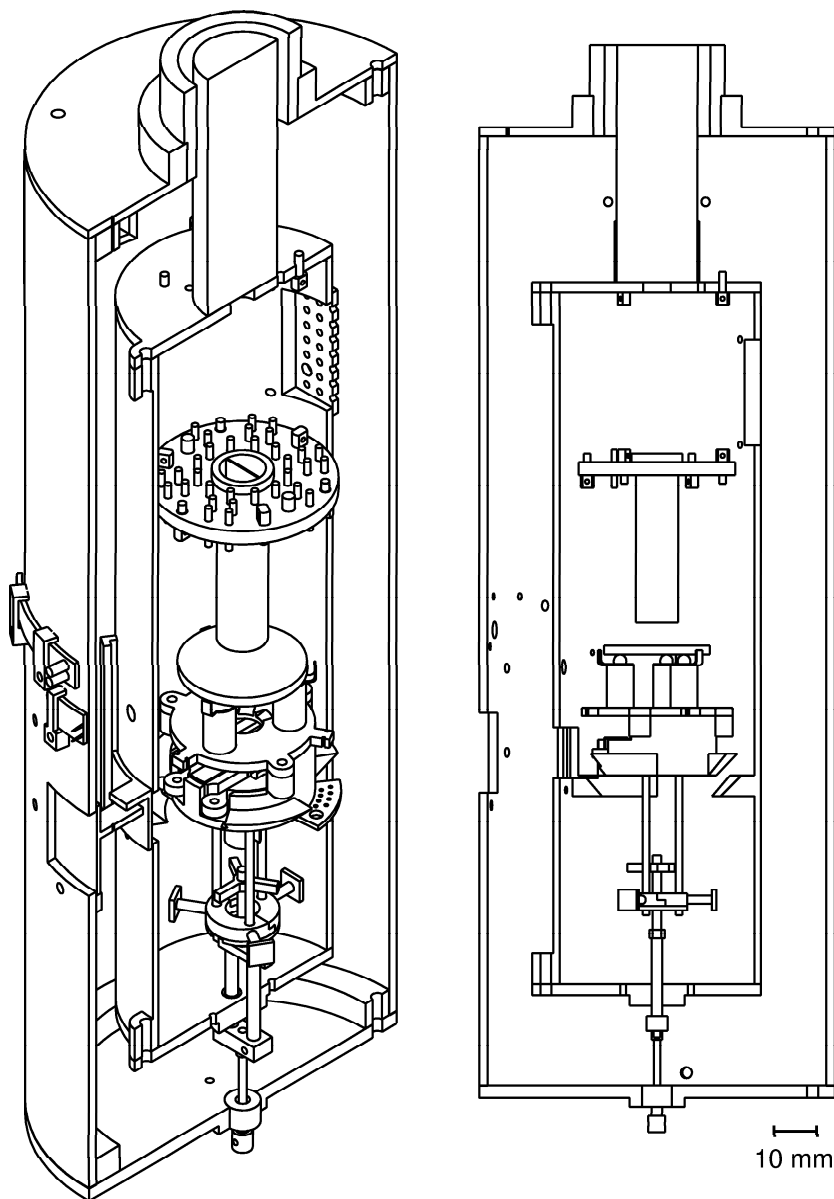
Drawing (AutoCAD) of the VT-STM suspended inside two radiation shields. The suspension springs are not shown.
